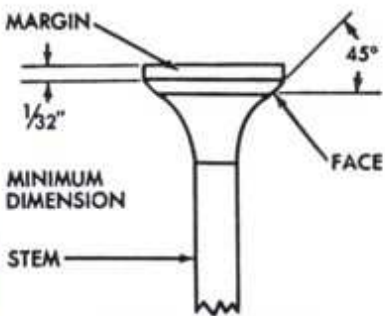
Valve face angle should be 45 degrees. Minimum valve head margin is 1/32-inch (0.8 mm).
